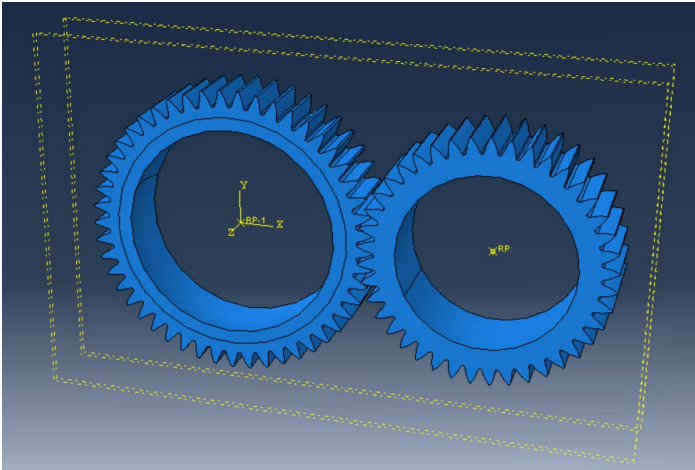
Abaqus representation of the assembly between planet gear and the sun gear
